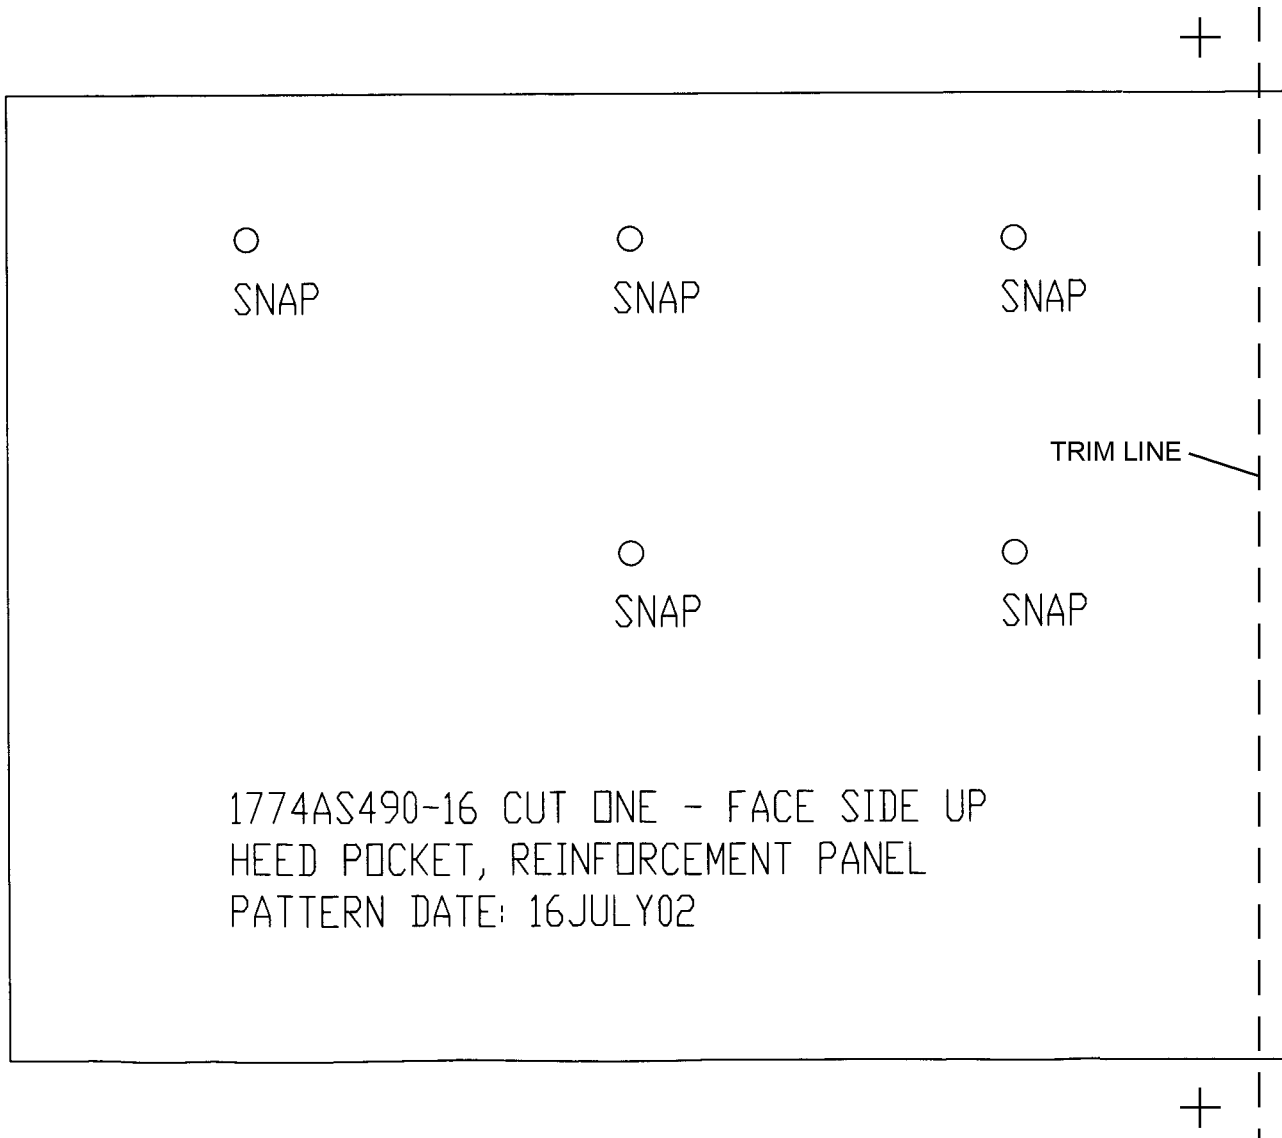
AD. HEED Pocket Main Panel Pattern (Sheet 3 of 3)
